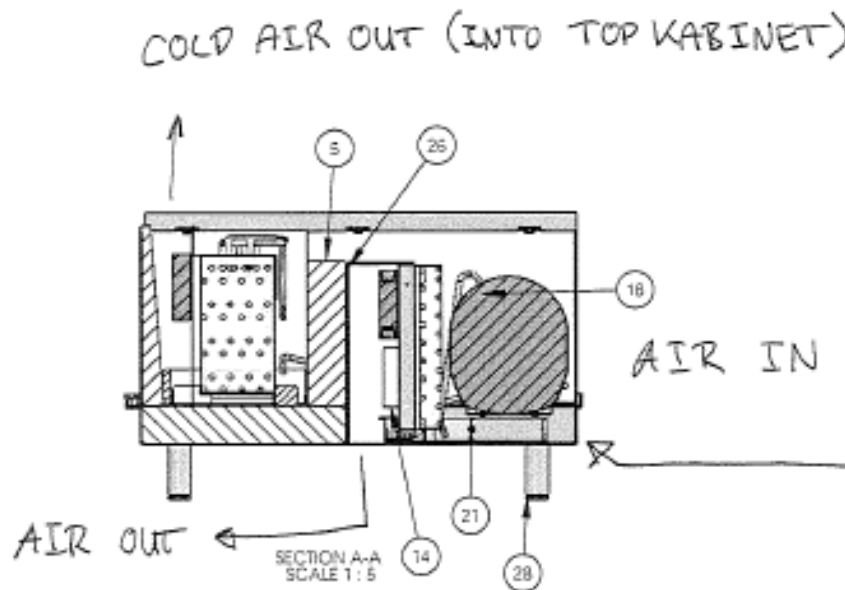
The refrigeration system is placed at the bottom of the cooler. In this figure, the compressor is placed on the right-hand side beside the condenser, which is air cooled by two DC fans. The evaporator is placed on the left-hand side and two DC fans distribute the cold air inside the drink compartment.
